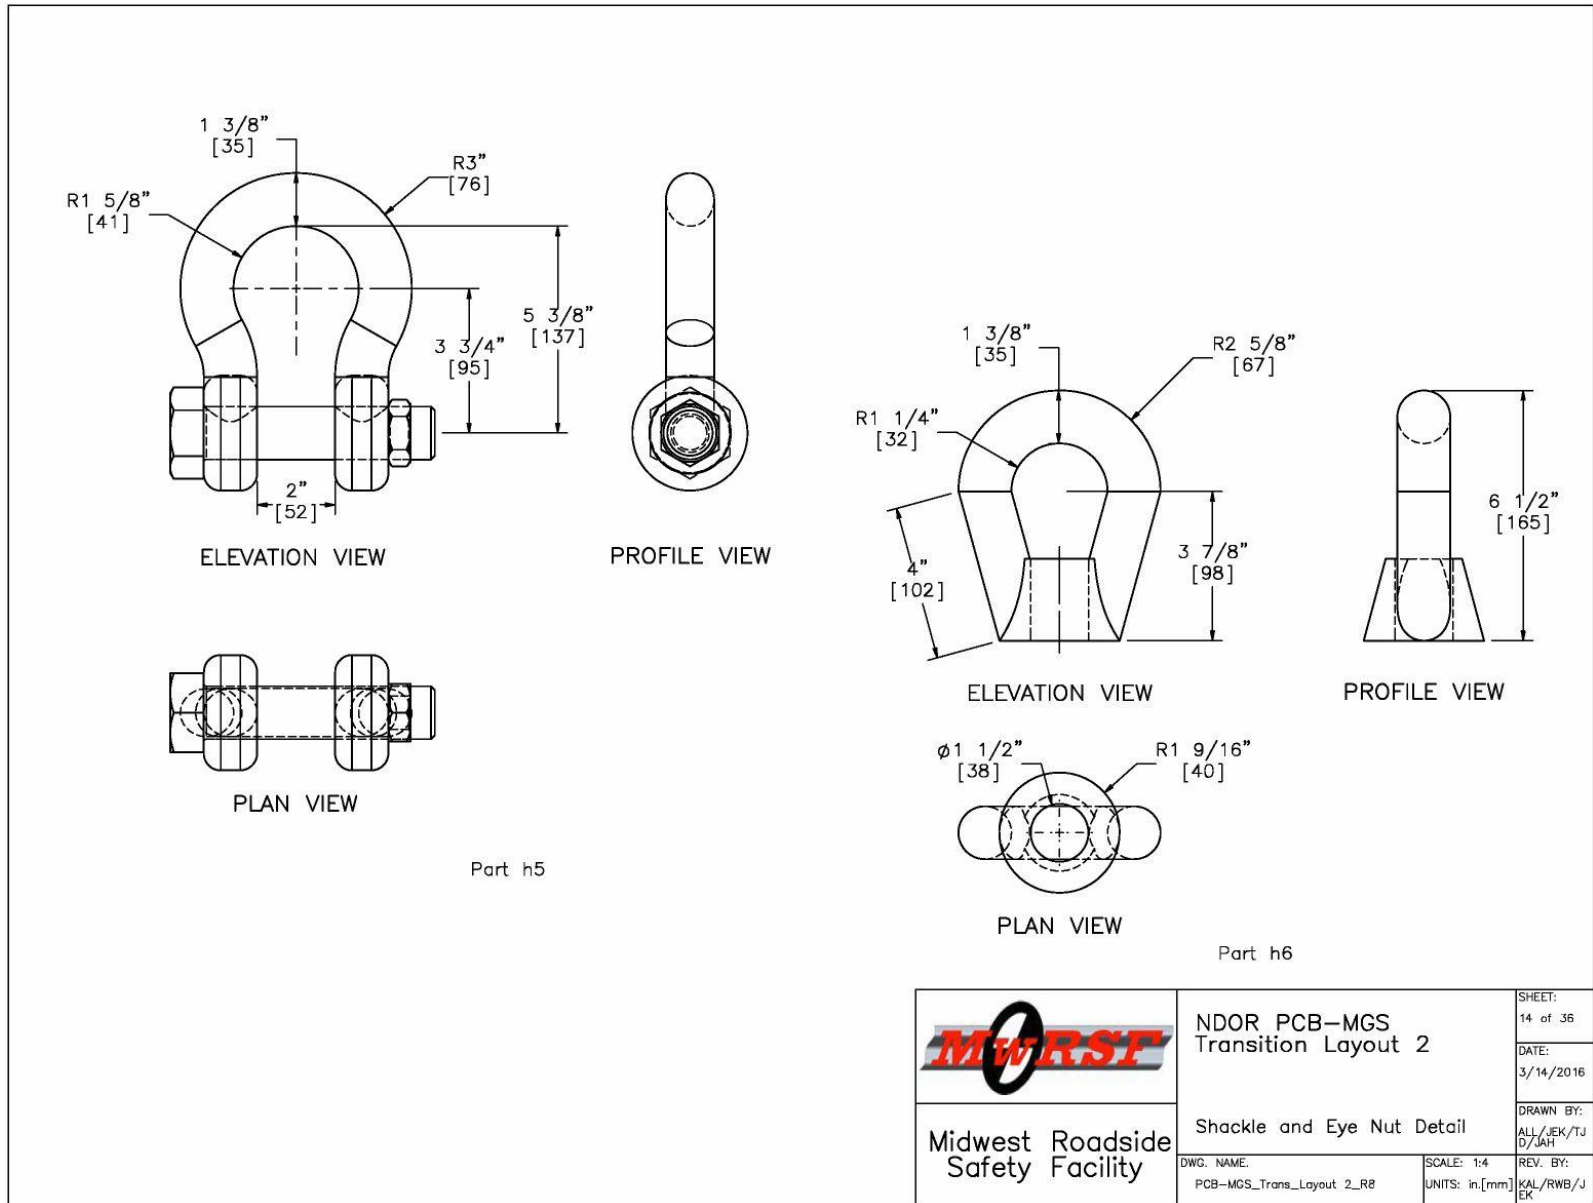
Shackle and Eye Nut Detail, Test No. MGSPCB-1
